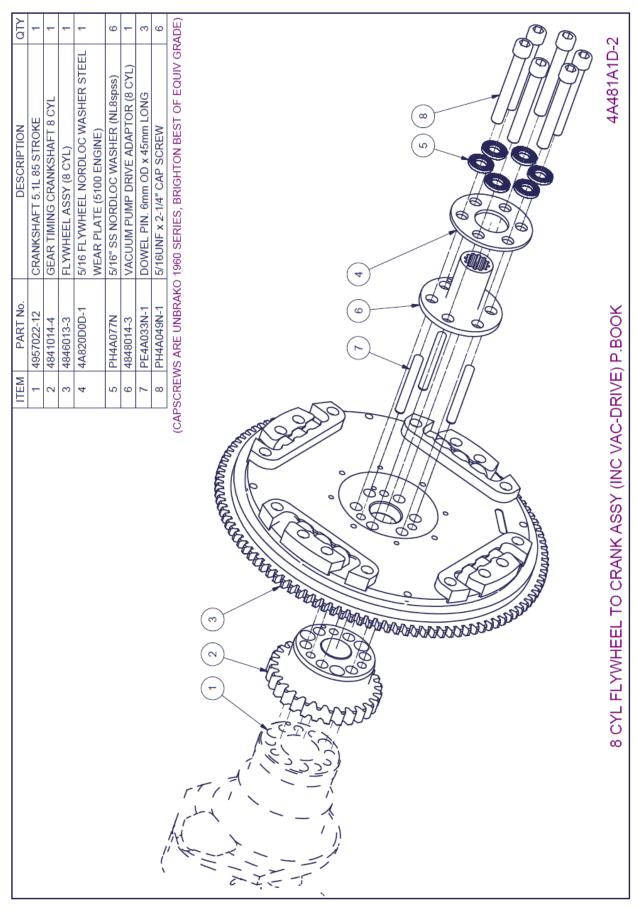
Crankshaft and Flywheel Assembly (with Vac-drive installed)
